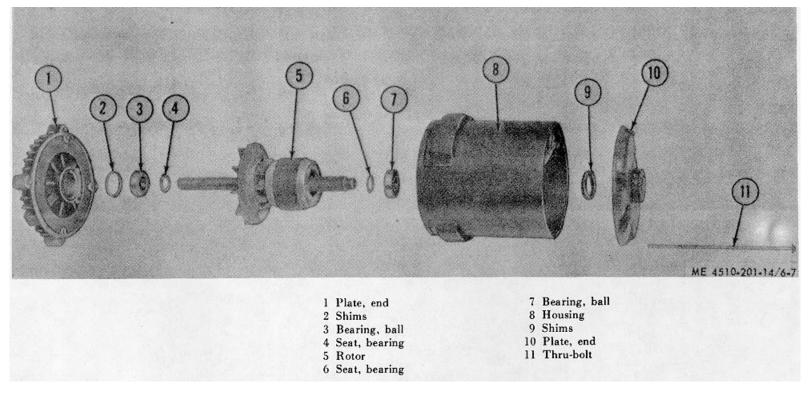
Water heater blower and fuel pump motor, disassembled. 6-12
